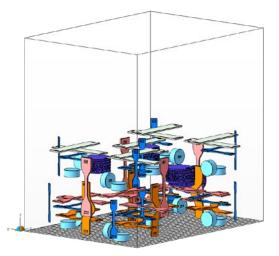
View of mechanical parts in the Half bucket part property test build. Other parts are hidden to more clearly show the part locations.
